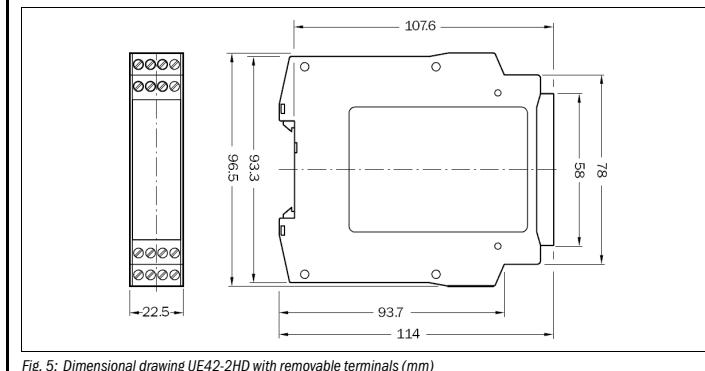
Dimensional drawing UE42-2HD with removable terminals (mm)
